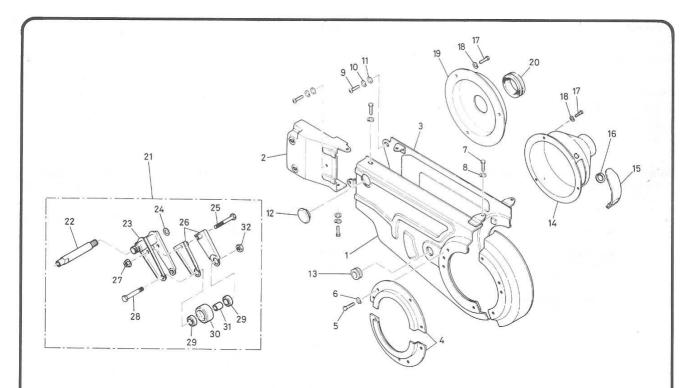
Chain case assembly - KLT200 and 250 (Sec 2)
